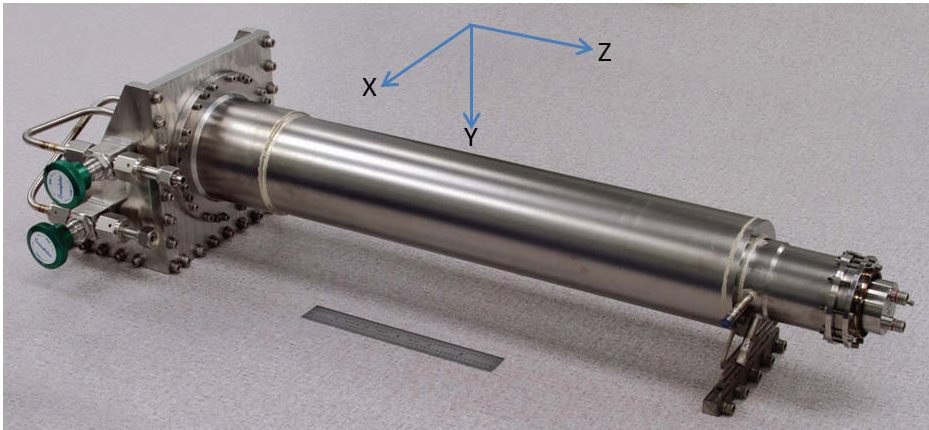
Photograph of recuperator/turboalternator assembly mounted with cold end flexure and warm end bracket.
